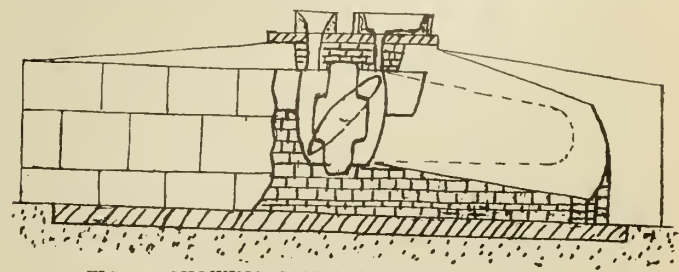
SHOWING COMPLETE CROSS SECTION OF ASSEMBLED MOLD.
